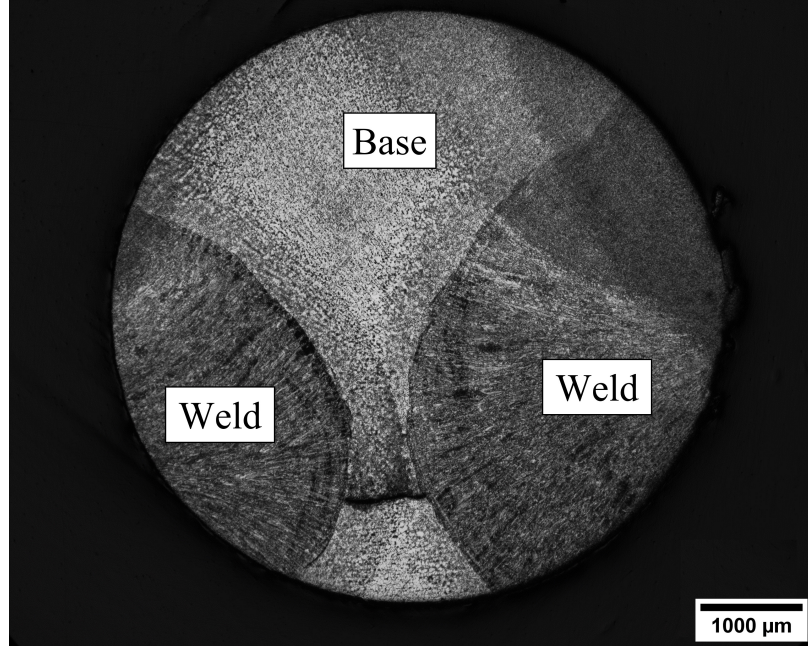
Cross-section of water wall welded membrane tensile specimen.
